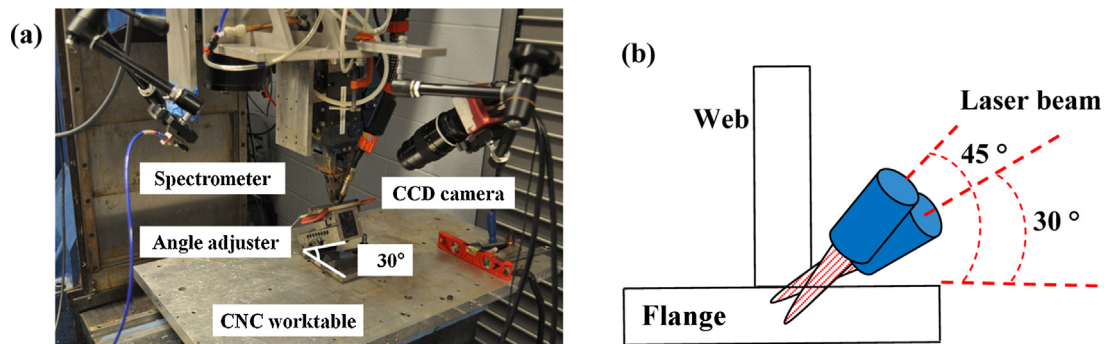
(a) Experimental setup of hybrid laser-GMA welding system; (b) positions of the laser beam running through the T-joint configuration.
